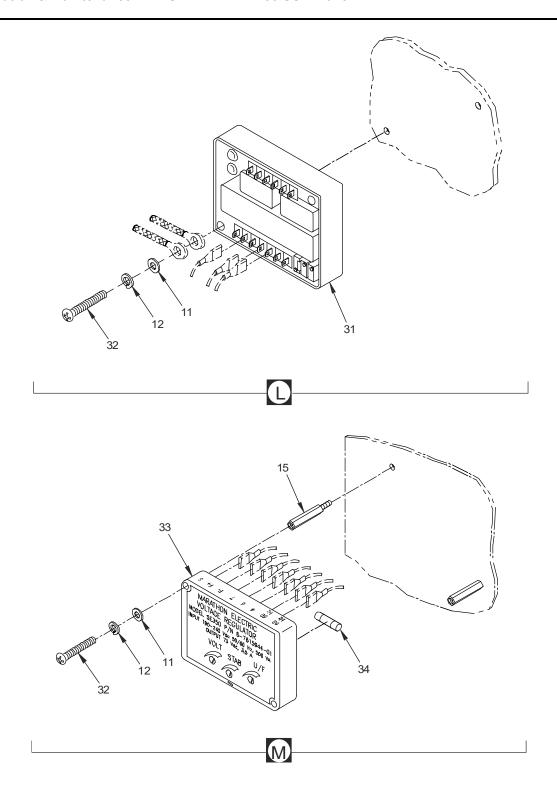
Barrier Panel Assembly (Sheet 7 of 7).
